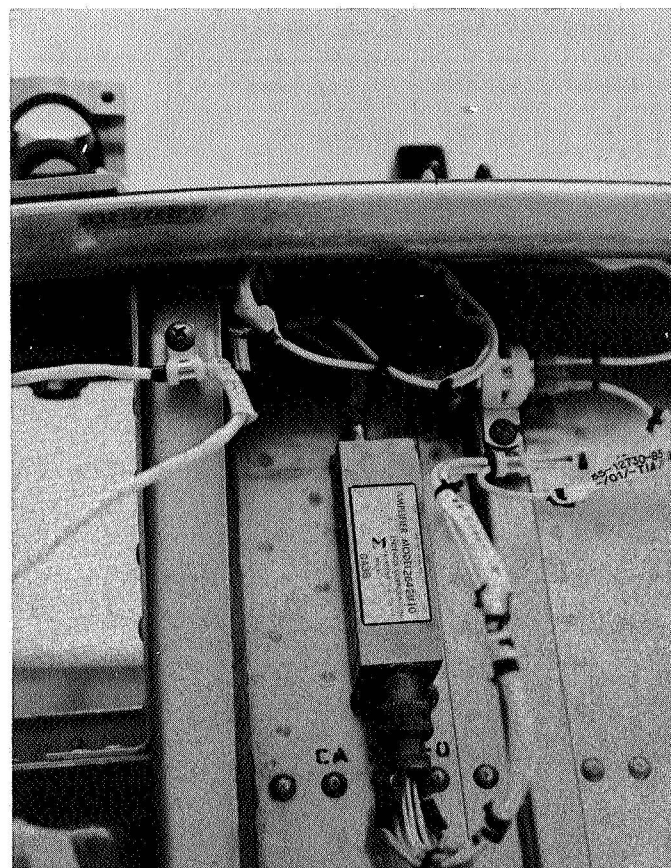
Installation of separation plane instrumentation, SC-5 through -7
